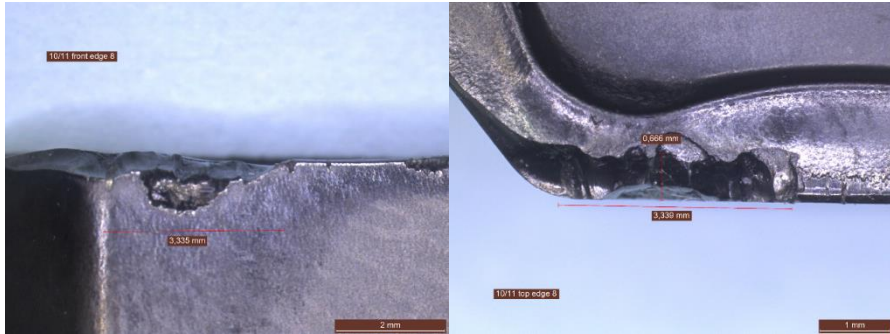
Insert with tool wear degree 3. Parts of the edge has been broken off
